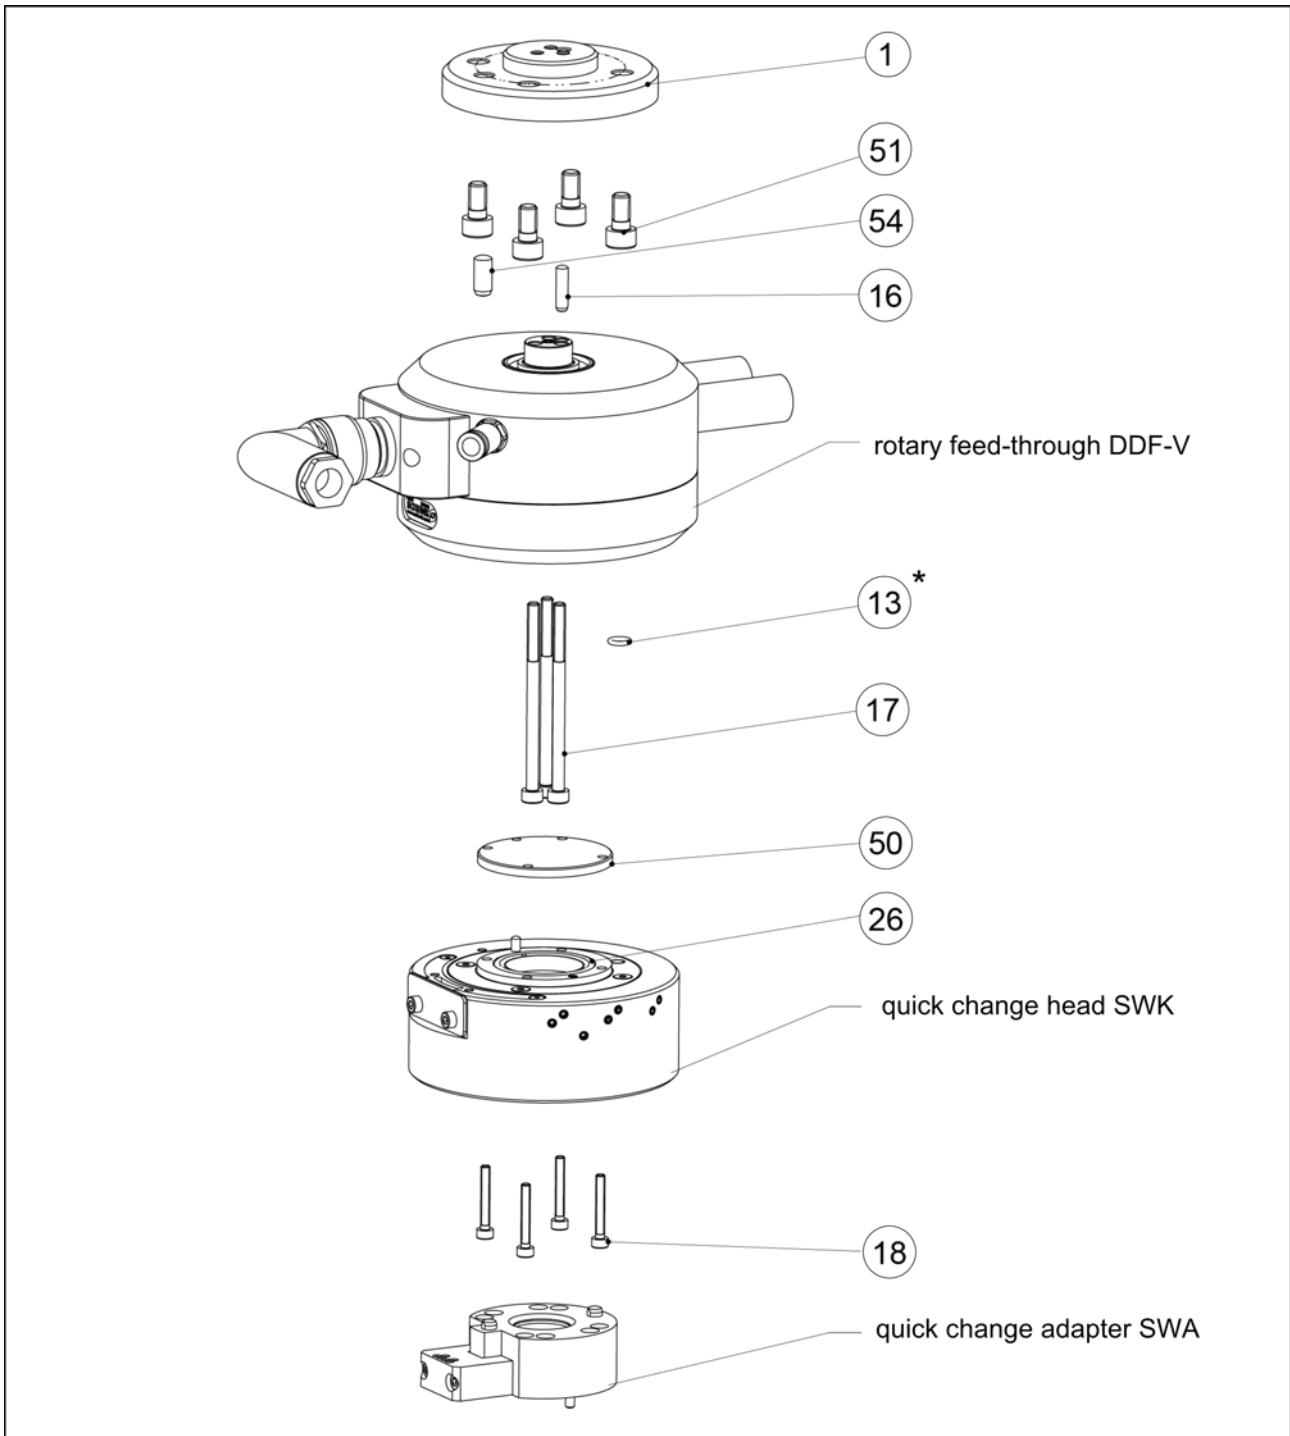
Assembly drawing of DDF-V with SWS-I-011
